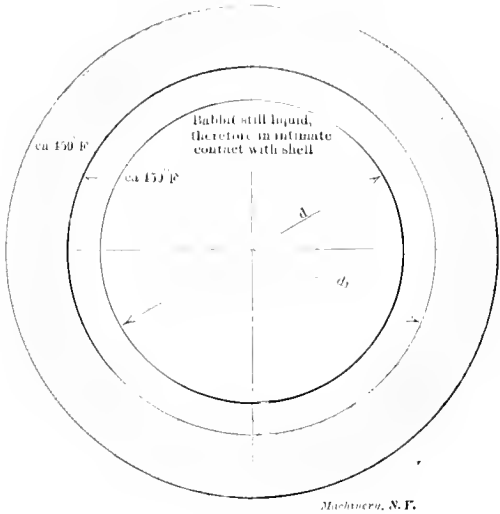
One-piece Bearing; Babbitt just Poured. Both Shell and Babbitt at the Solidifying Temperature.
